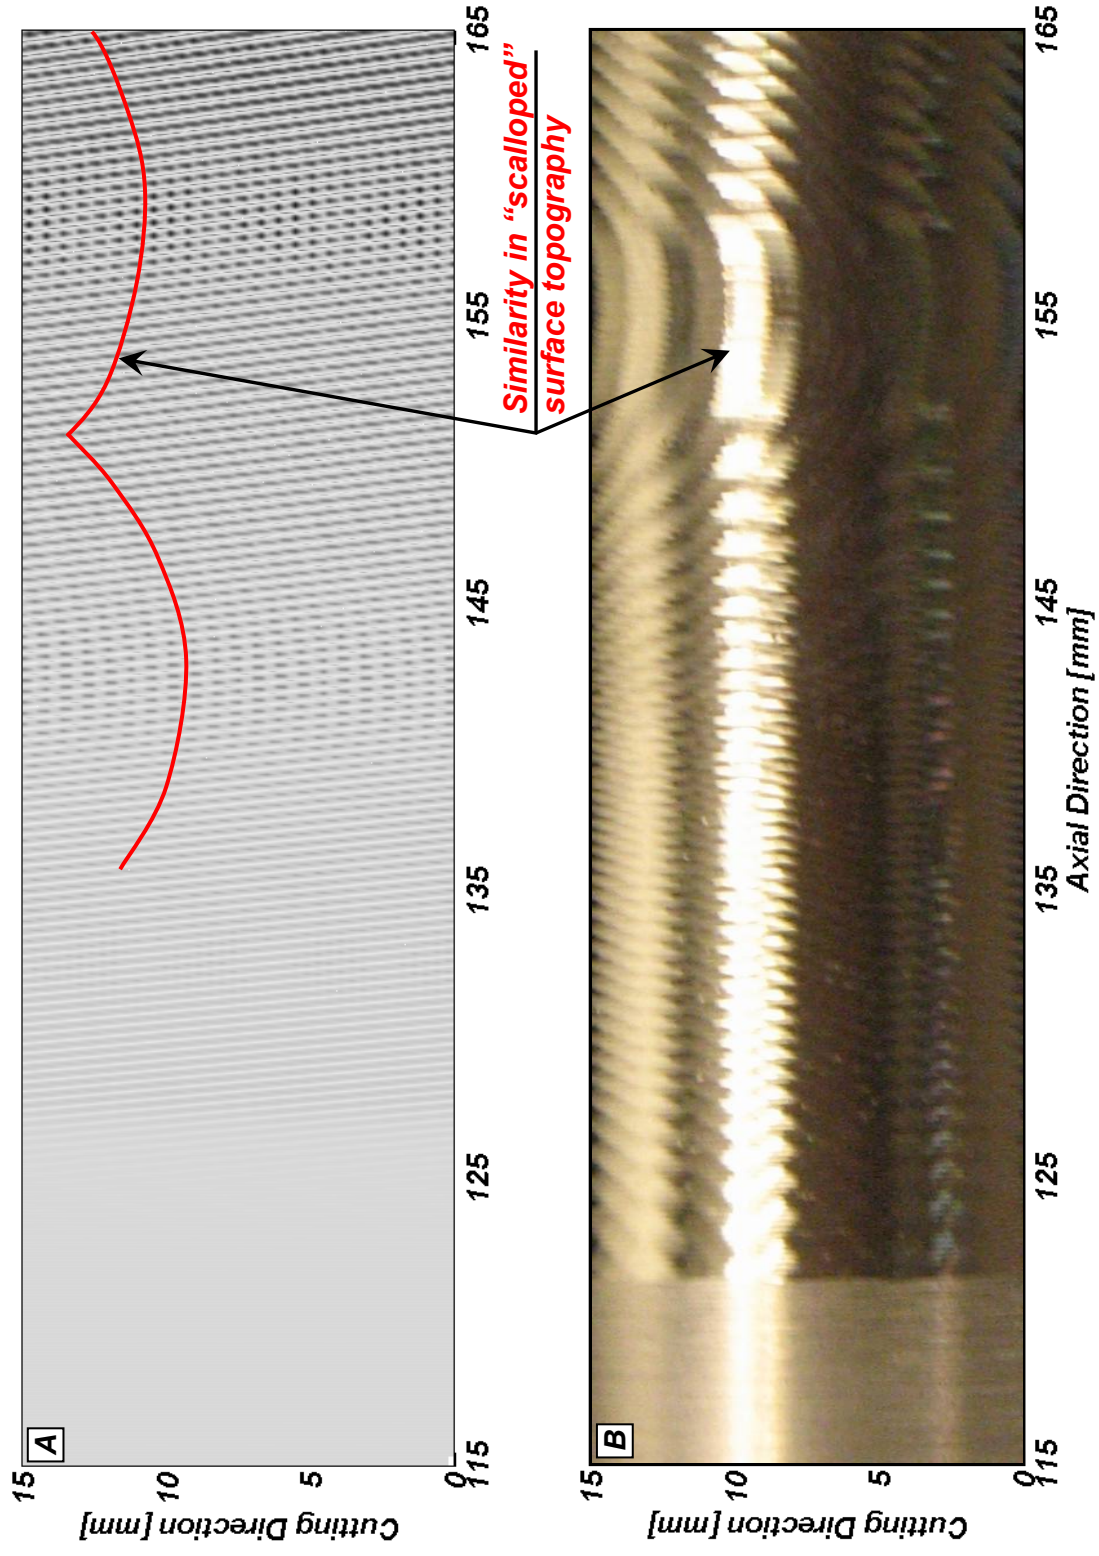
Workpiece surfaces generated during unstable cutting showing chatter marks. (A) Simulation; (B) picture of the actual machined workpiece surface.
